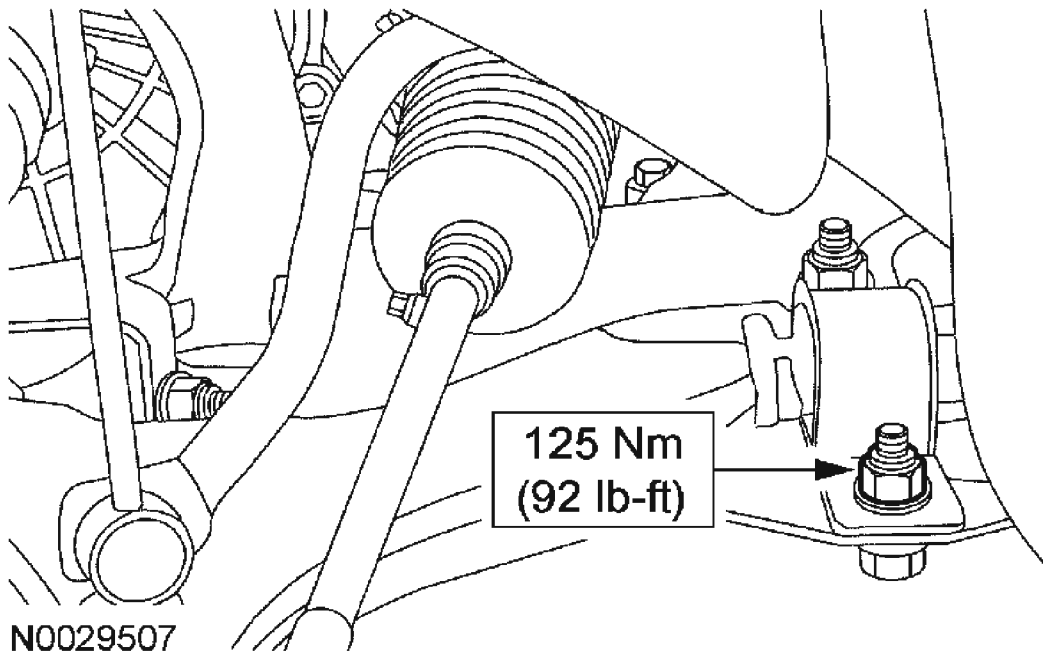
Tightening Lower Arm Front Pivot Bolt
